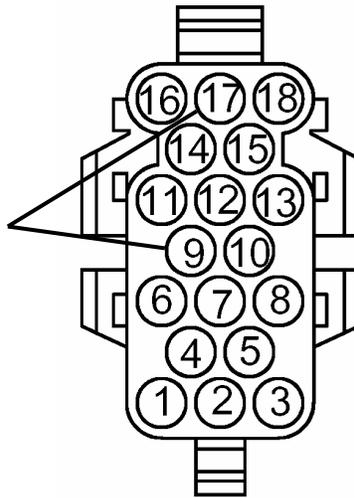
PU Main Connector (Front View) - Pressure Switch Pinout
